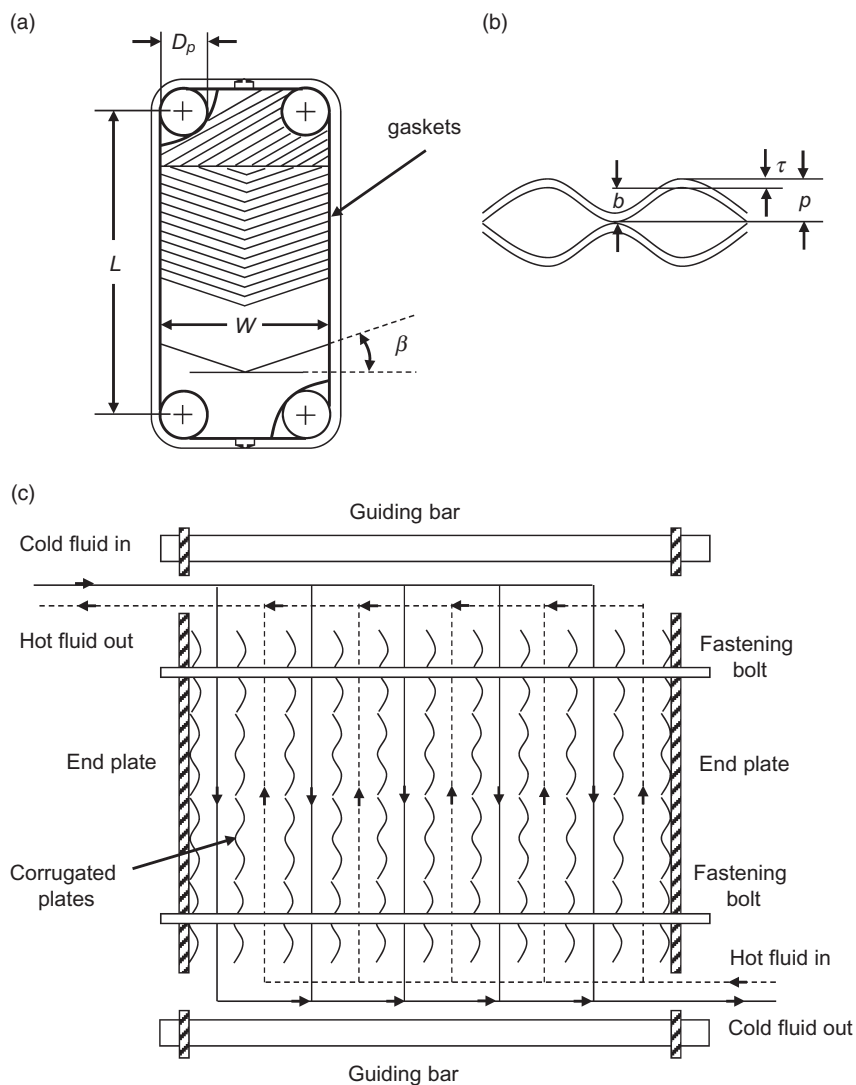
Plate and frame heat exchanger: (a) plate geometry; (b) detail of sectional area for fluid flow; (c) overall exchanger assembly.
